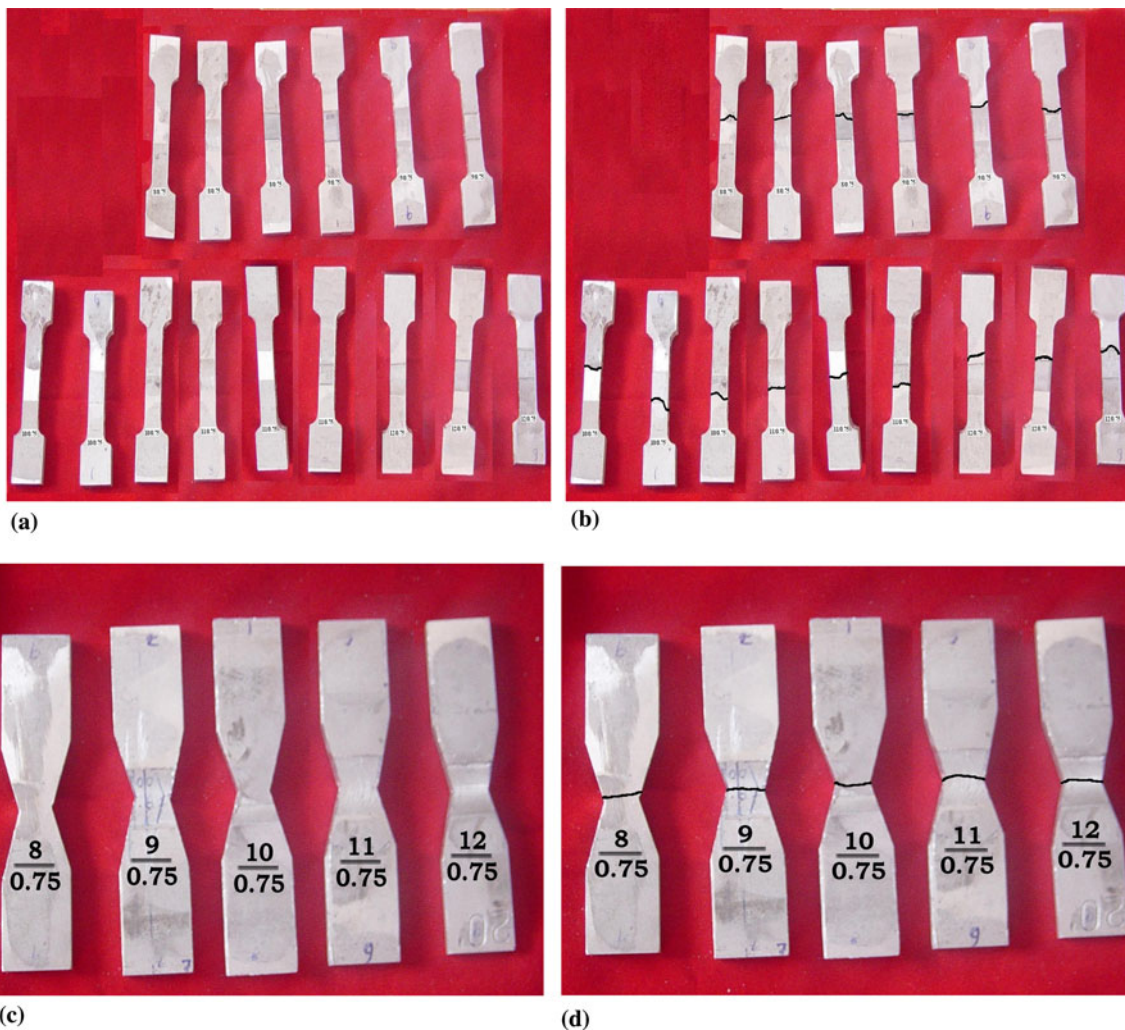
Photograph of tensile specimens. (a) Unnotched tensile specimen (before testing). (b) Unnotched tensile specimen (after testing). (c) Notch tensile specimen (before testing). (d) Notch tensile specimen (after testing)
